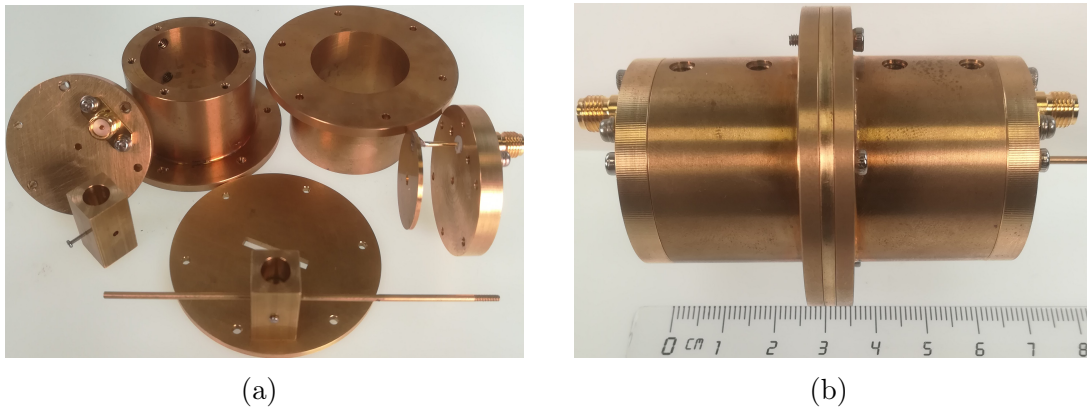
The fabricated 2nd-order multi-octave BW tunable coaxial filter: (a) Disassembled, and (b) final assembled prototype.
